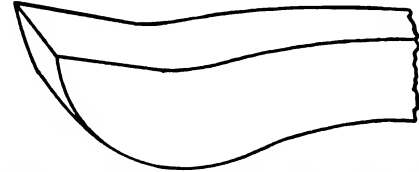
THE CUTTING END OF THE FINISHING TOOL IS STRAIGHT
